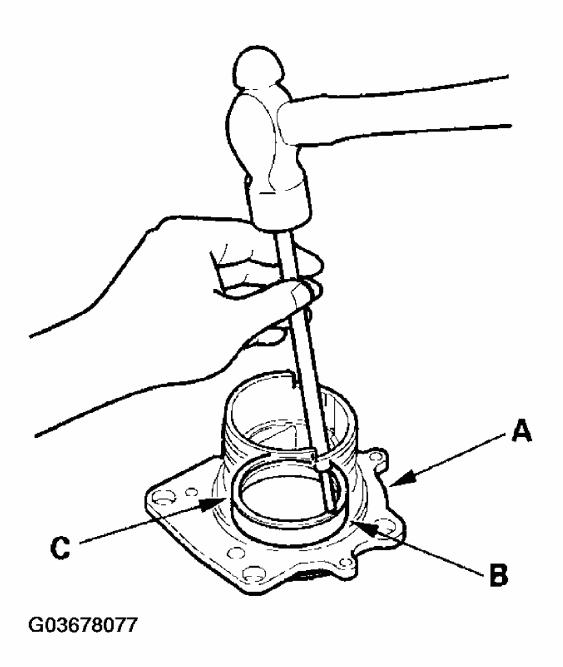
Removing Tapered Roller Bearing Outer Race And 76mm Thrust Shim From Transfer Holder
